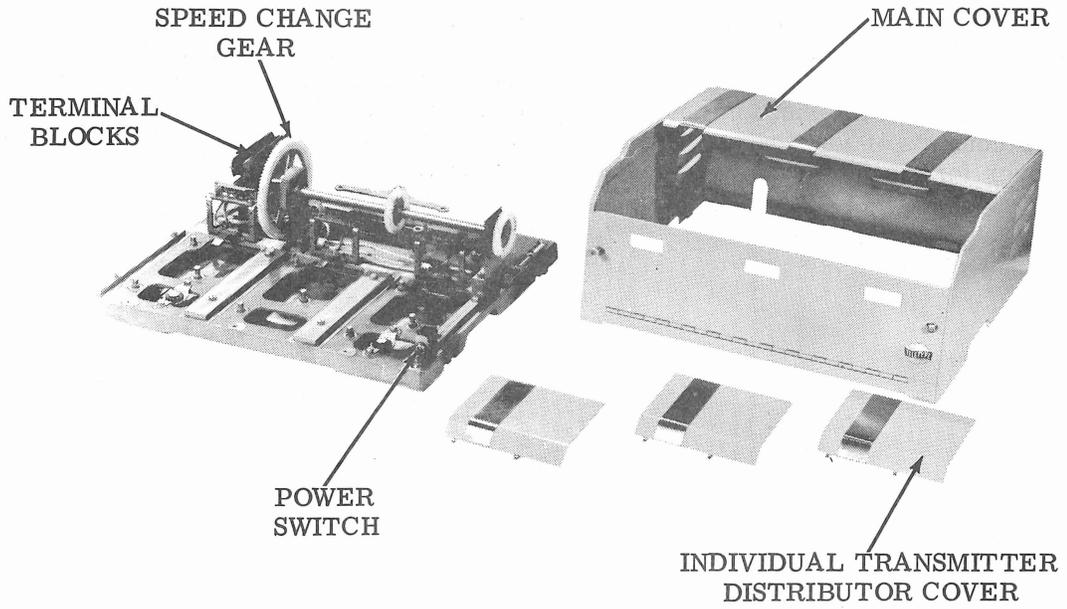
Multicontact Multiple Mounting Transmitter Distributor Base (Common Speed)
